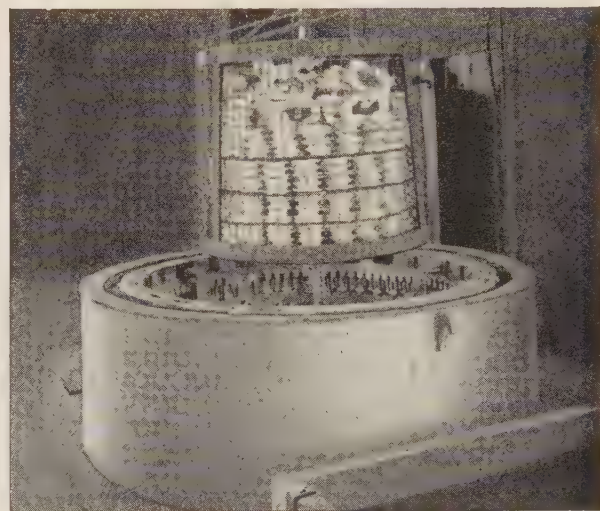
84-Kw. PIT TYPE ELECTRIC FURNACE FOR HEAT TREATING ALUMINUM ALLOY CASTINGS
